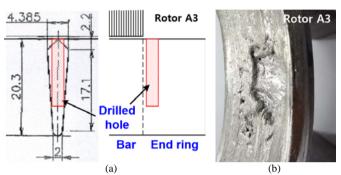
(a) Location of end ring holes for emulating unformly distributed porosity (rotor A3), and (b) end ring porosity due to manufacturing defect observed for rotor A3 (rotor A3)
